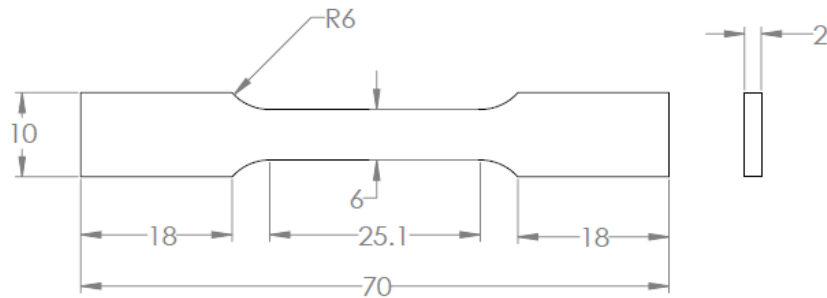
Schematic drawing of the modified subsize ASTM E8 flat dog bone-style tensile specimens (dimensions in millimeters).
